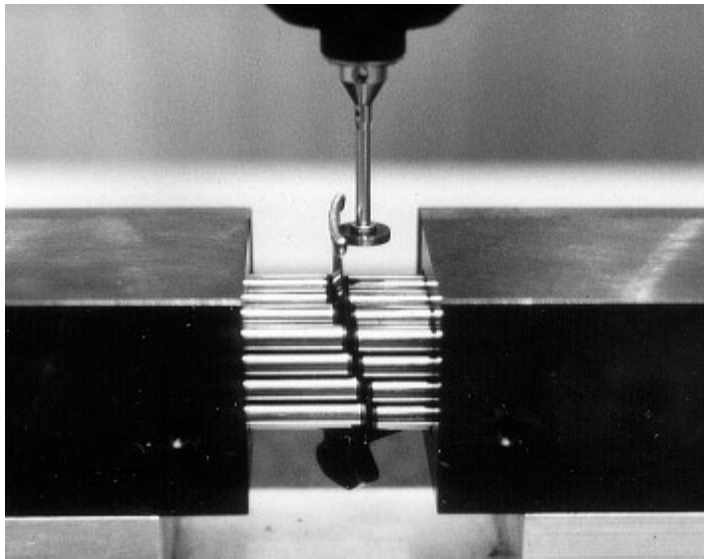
3 Repairing tip of a turbine blade with mounting jig using support pins on the turbine surfaces [142]
